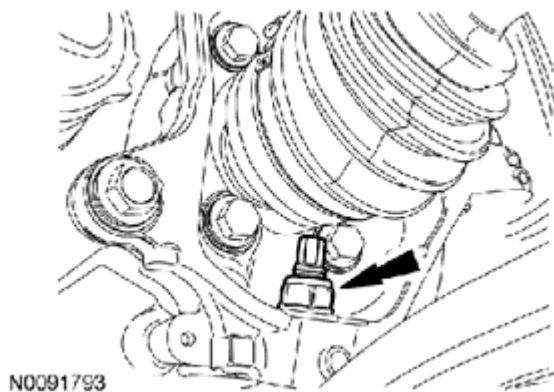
Locating A/C Compressor, Stud Bolts And Bolts
